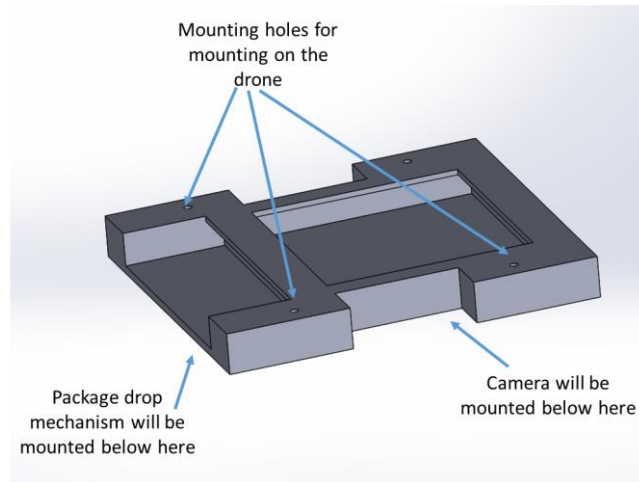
Model of mount for mounting the package drop mechanism and the camera together
